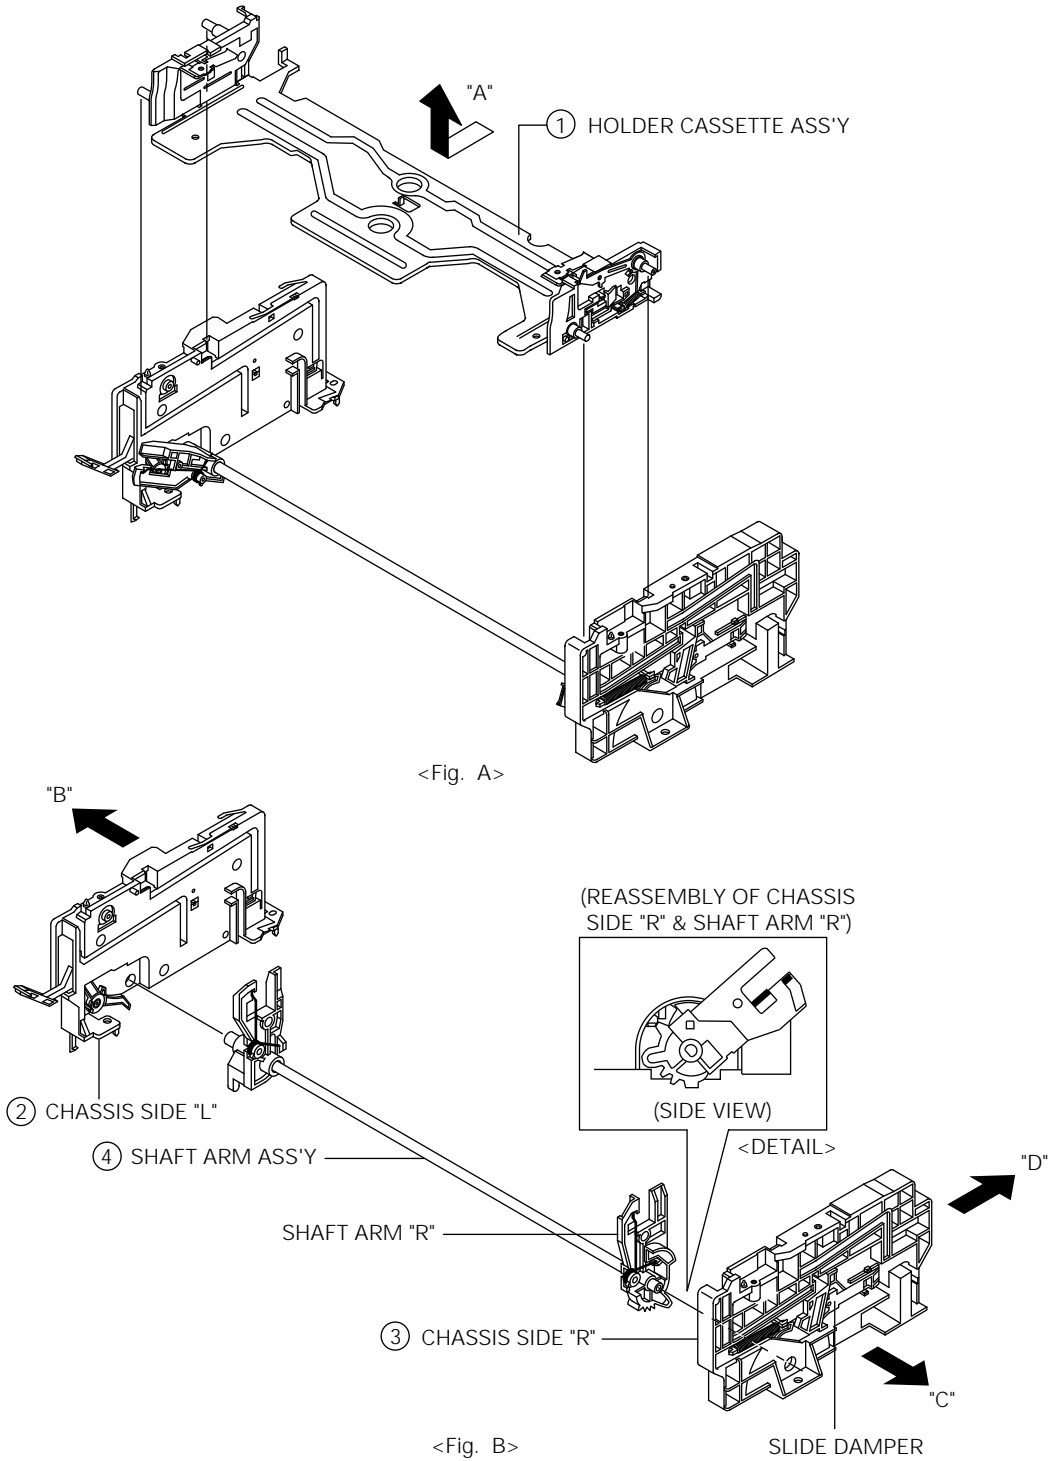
Holder Cassette Ass'y and Chassis Side L/R
